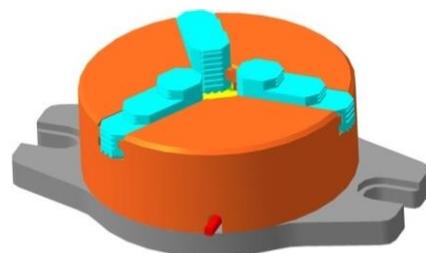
Adjustable locating modules for locating of parts according to internal cylindrical surfaces
